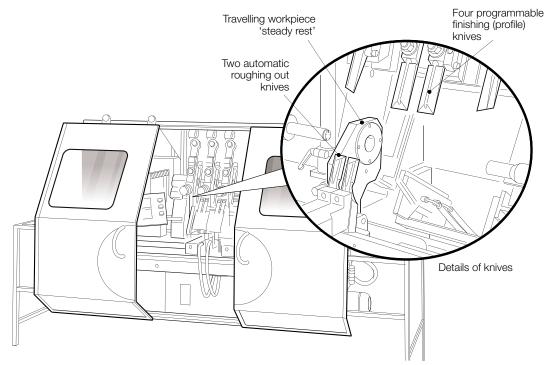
Fully hydraulic automatic copy lathe with interlocked enclosure
